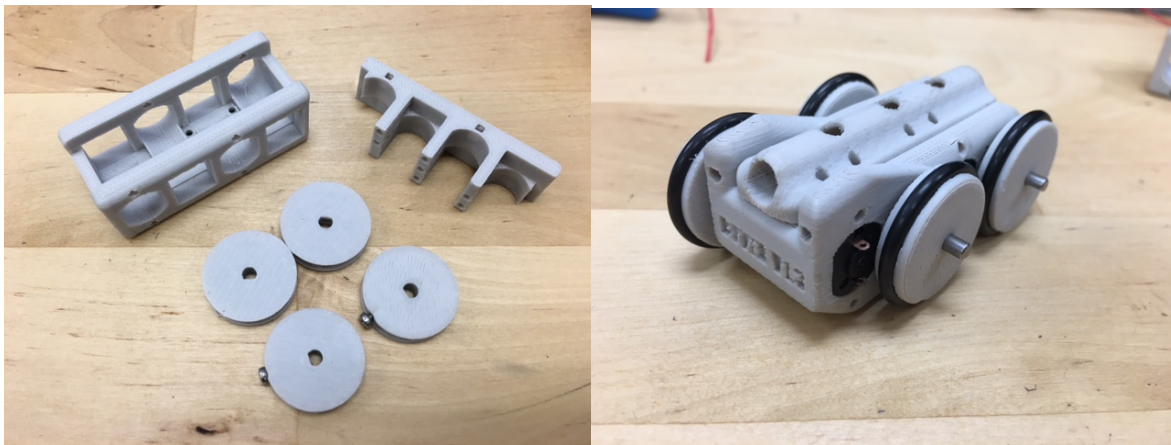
3D printed components (left), assembled inspection tool (right).
